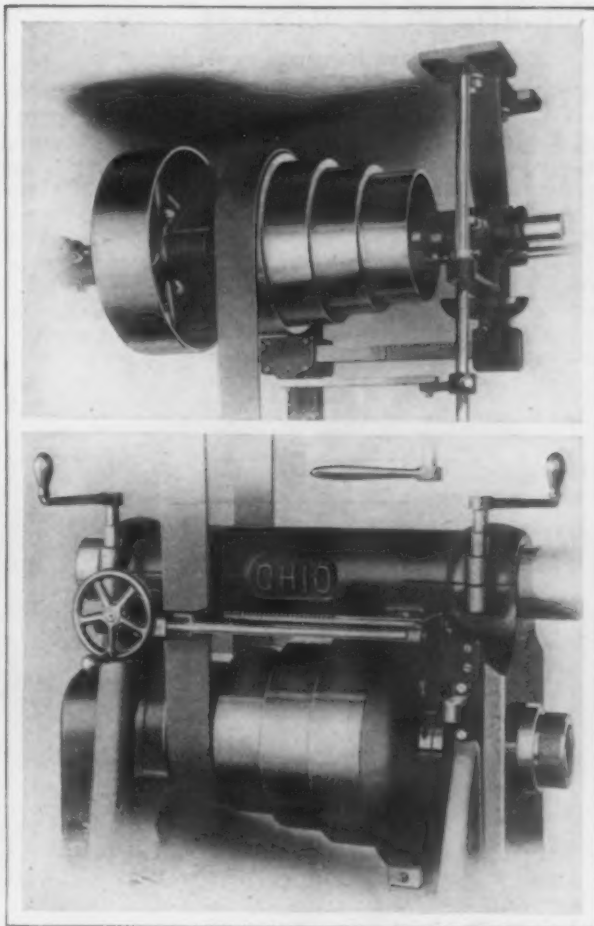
The New Type of Belt Shifting Mechanism Employed
